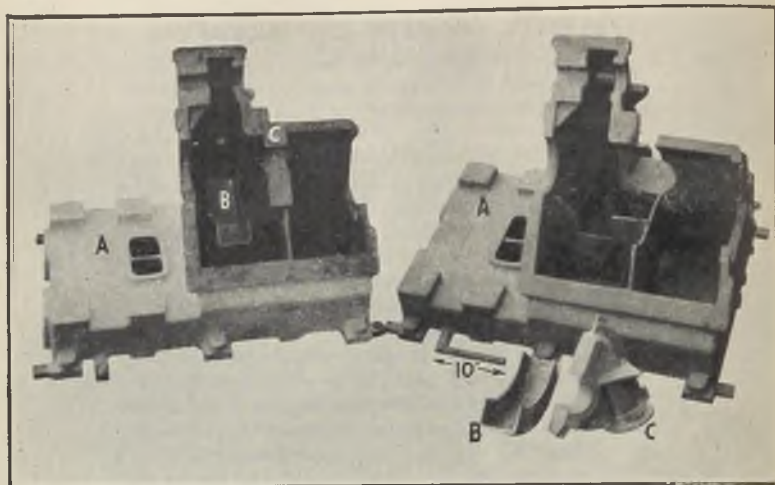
COMPLICATED CAST ALUMINIUM-SILICON ALLOY ASSEMBLY, ACHIEVED BY WELDING TOGETHER THE THREE CASTINGS SHOWN ON THE RIGHT.
